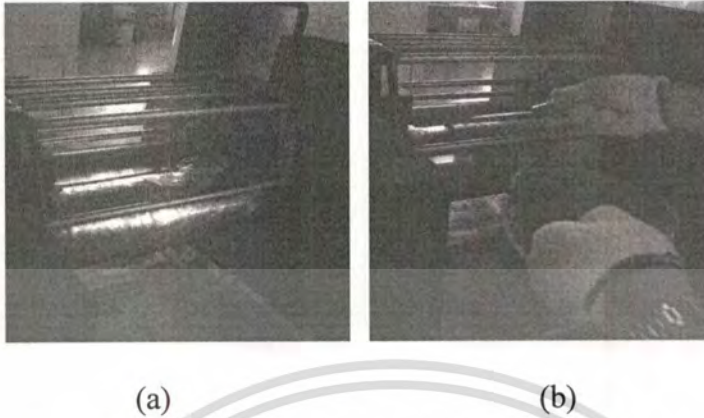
(a) Molten sheet of mixed LDPE on the surface of two-roll mill
